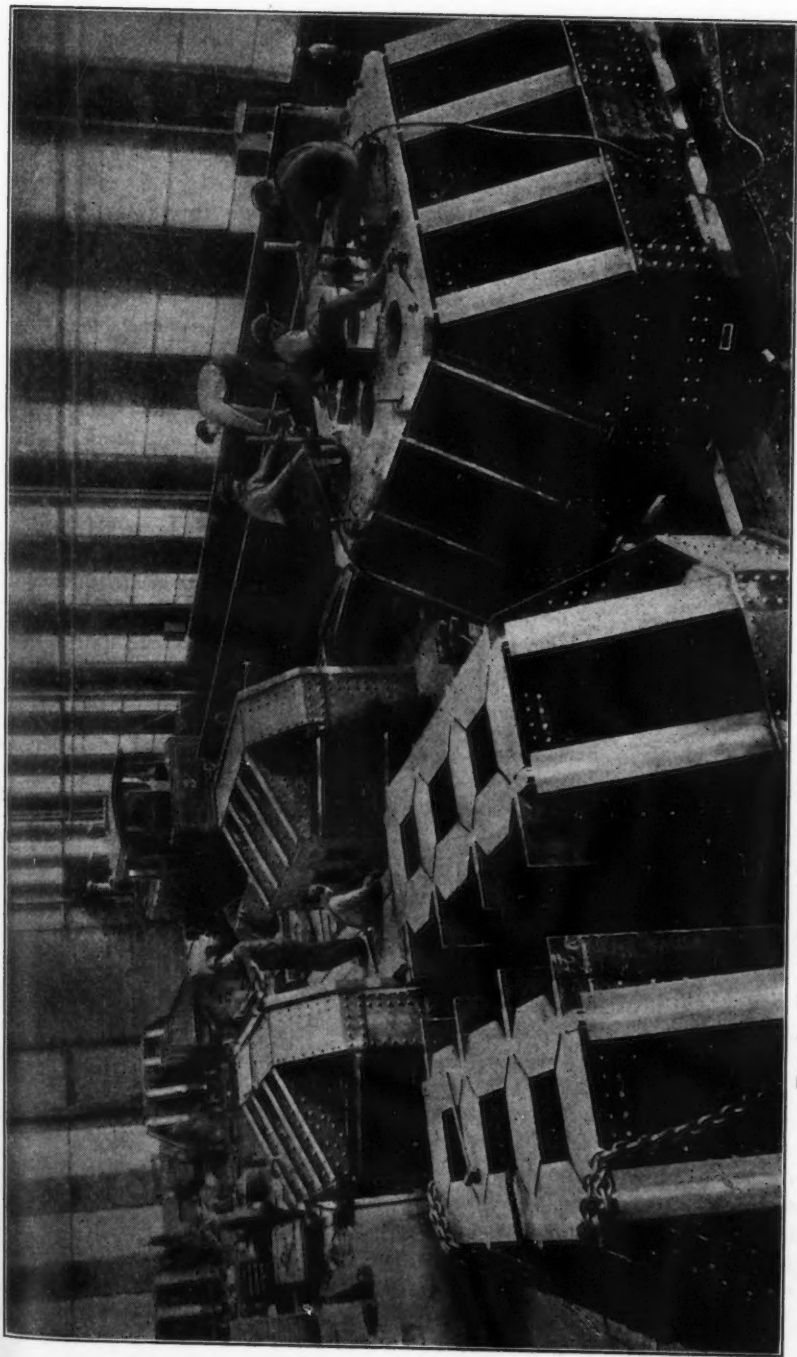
TOWER PEDESTALS IN PROCESS OF FABRICATION, GEORGE WASHINGTON BRIDGE.
